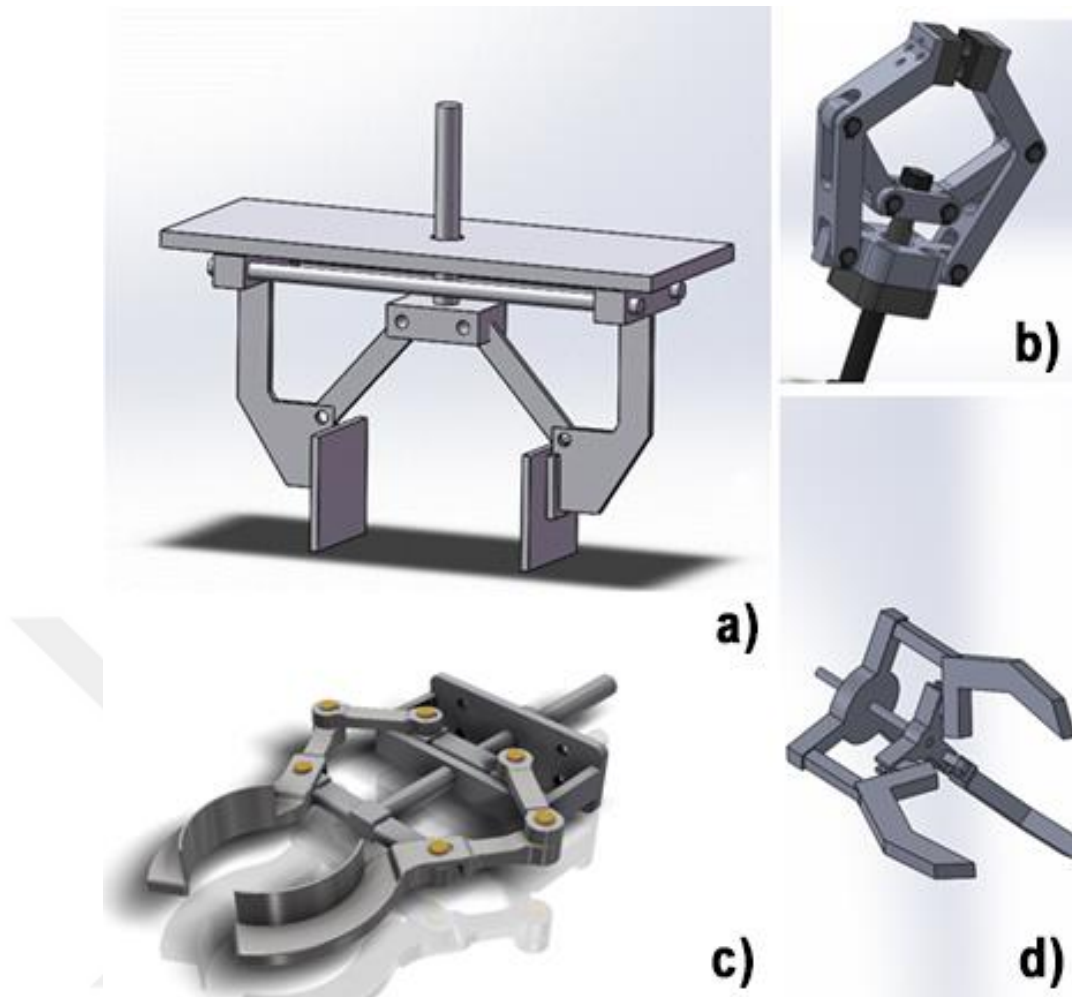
Mechanisms driven by force transfer rod on middle to drive gripper arms (a is plunger activated gripper [16], b is pneumatic gripper [17], c is middle stick driven robot gripper [18], d is three legged gripper [19])
